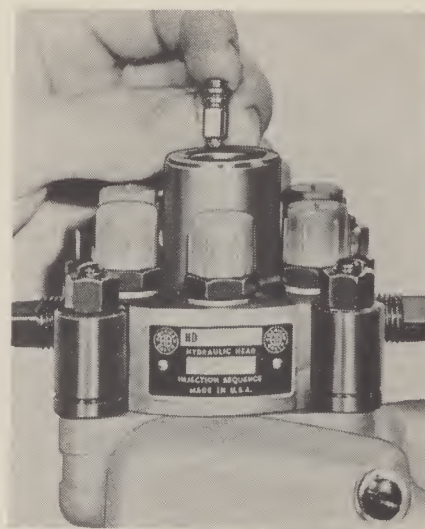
A stuck, scratched or corroded delivery valve may cause hard starting or non-starting of engine.
